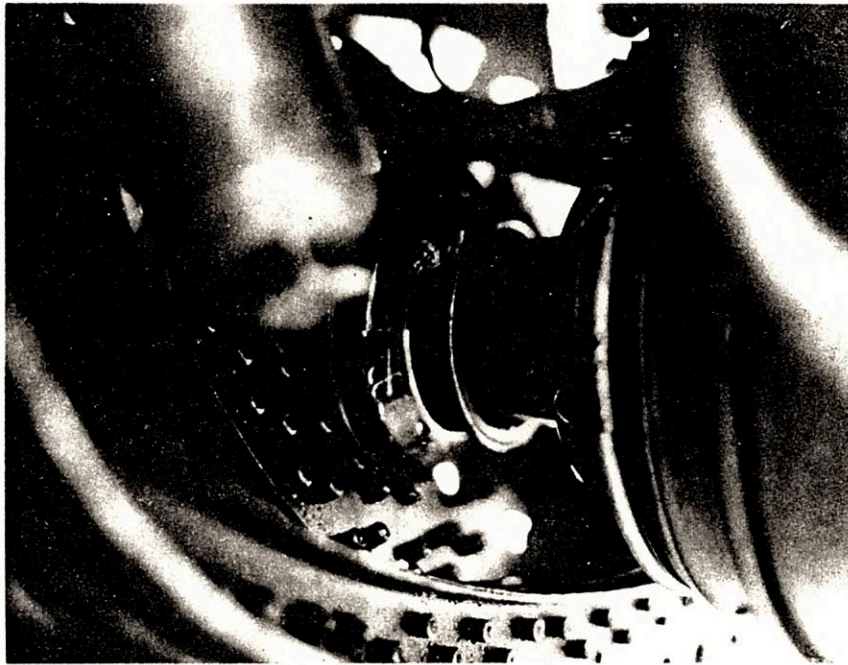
CSD/GENERATOR COOLING AIR DUCT ASSEMBLY
